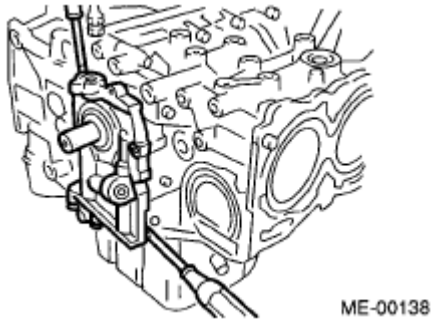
Removing Oil Pump From Cylinder Block Using Flat Tip Screwdriver
